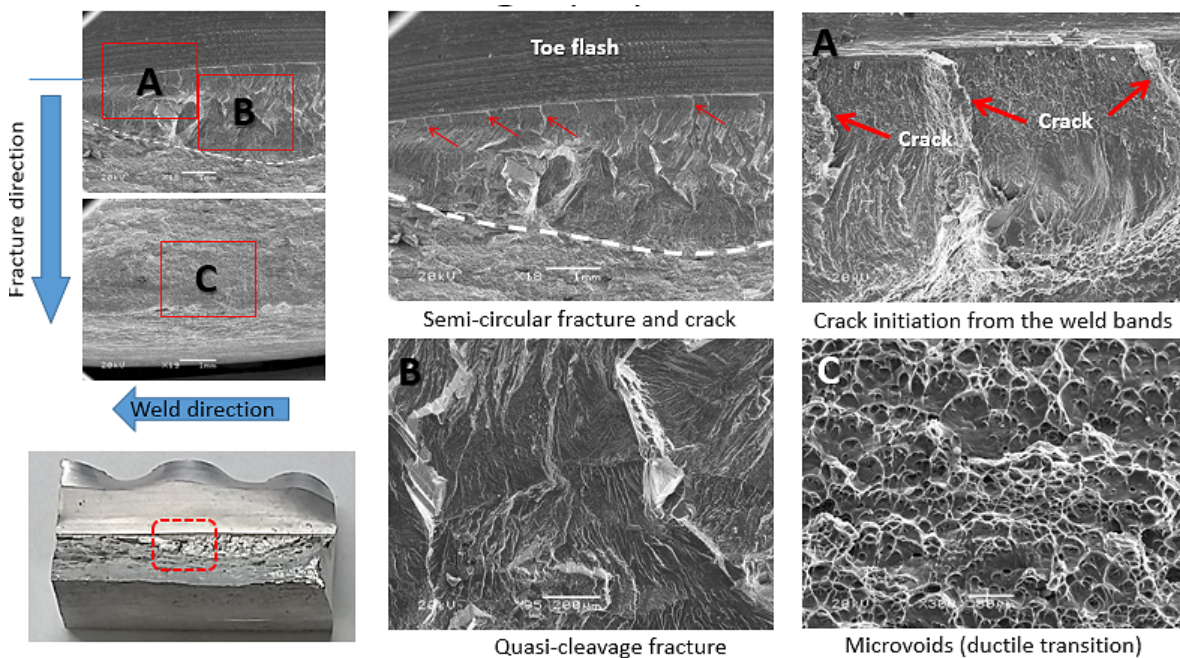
Fractograph of fractured specimen from A6TF Plate 01 (Shah, 2017)
